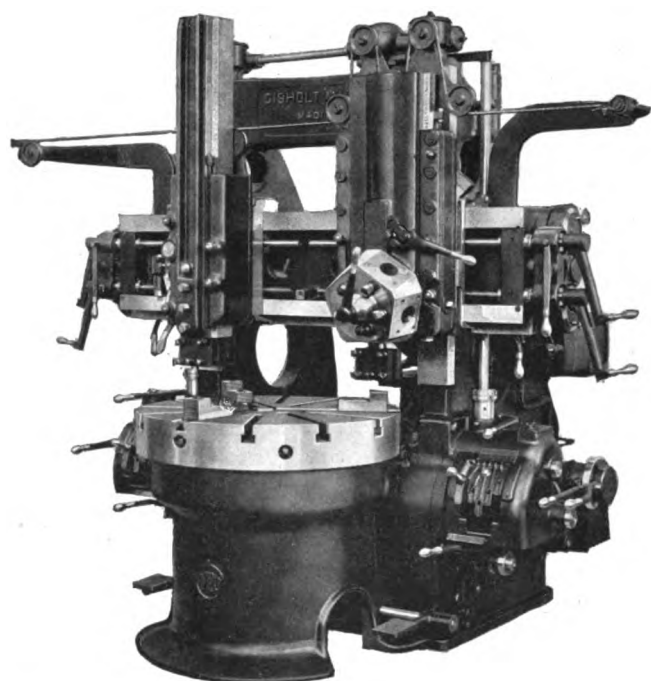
Gisholt Vertical Boring Mill Equipped with Chuck Table and Right Hand Turret Head
